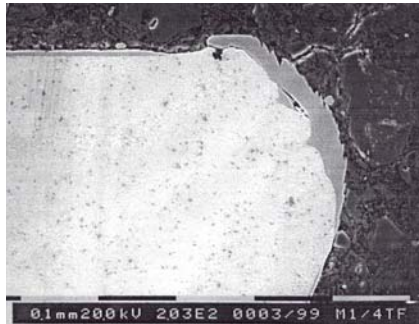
Sectioned of Tool A showing delamination of coating on the bevelled face after face milling for 5 seconds at 80 m/min
